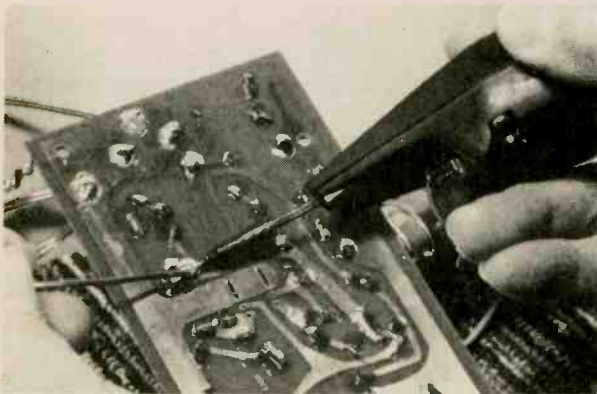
Use a low-voltage soldering iron in wiring up the small PC board.
